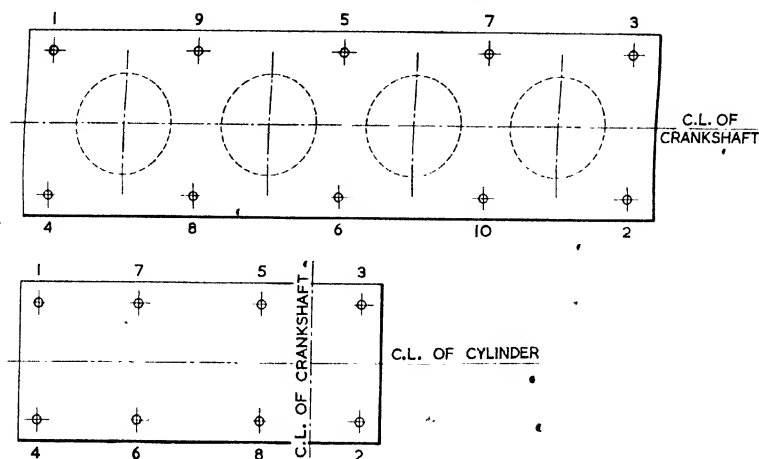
CORRECT ORDER FOR TIGHTENING HOLDING-DOWN BOLTS. (Top) FOUR-CYLINDER VERTICAL ENGINE. (Bottom) SINGLE-CYLINDER HORIZONTAL ENGINE
